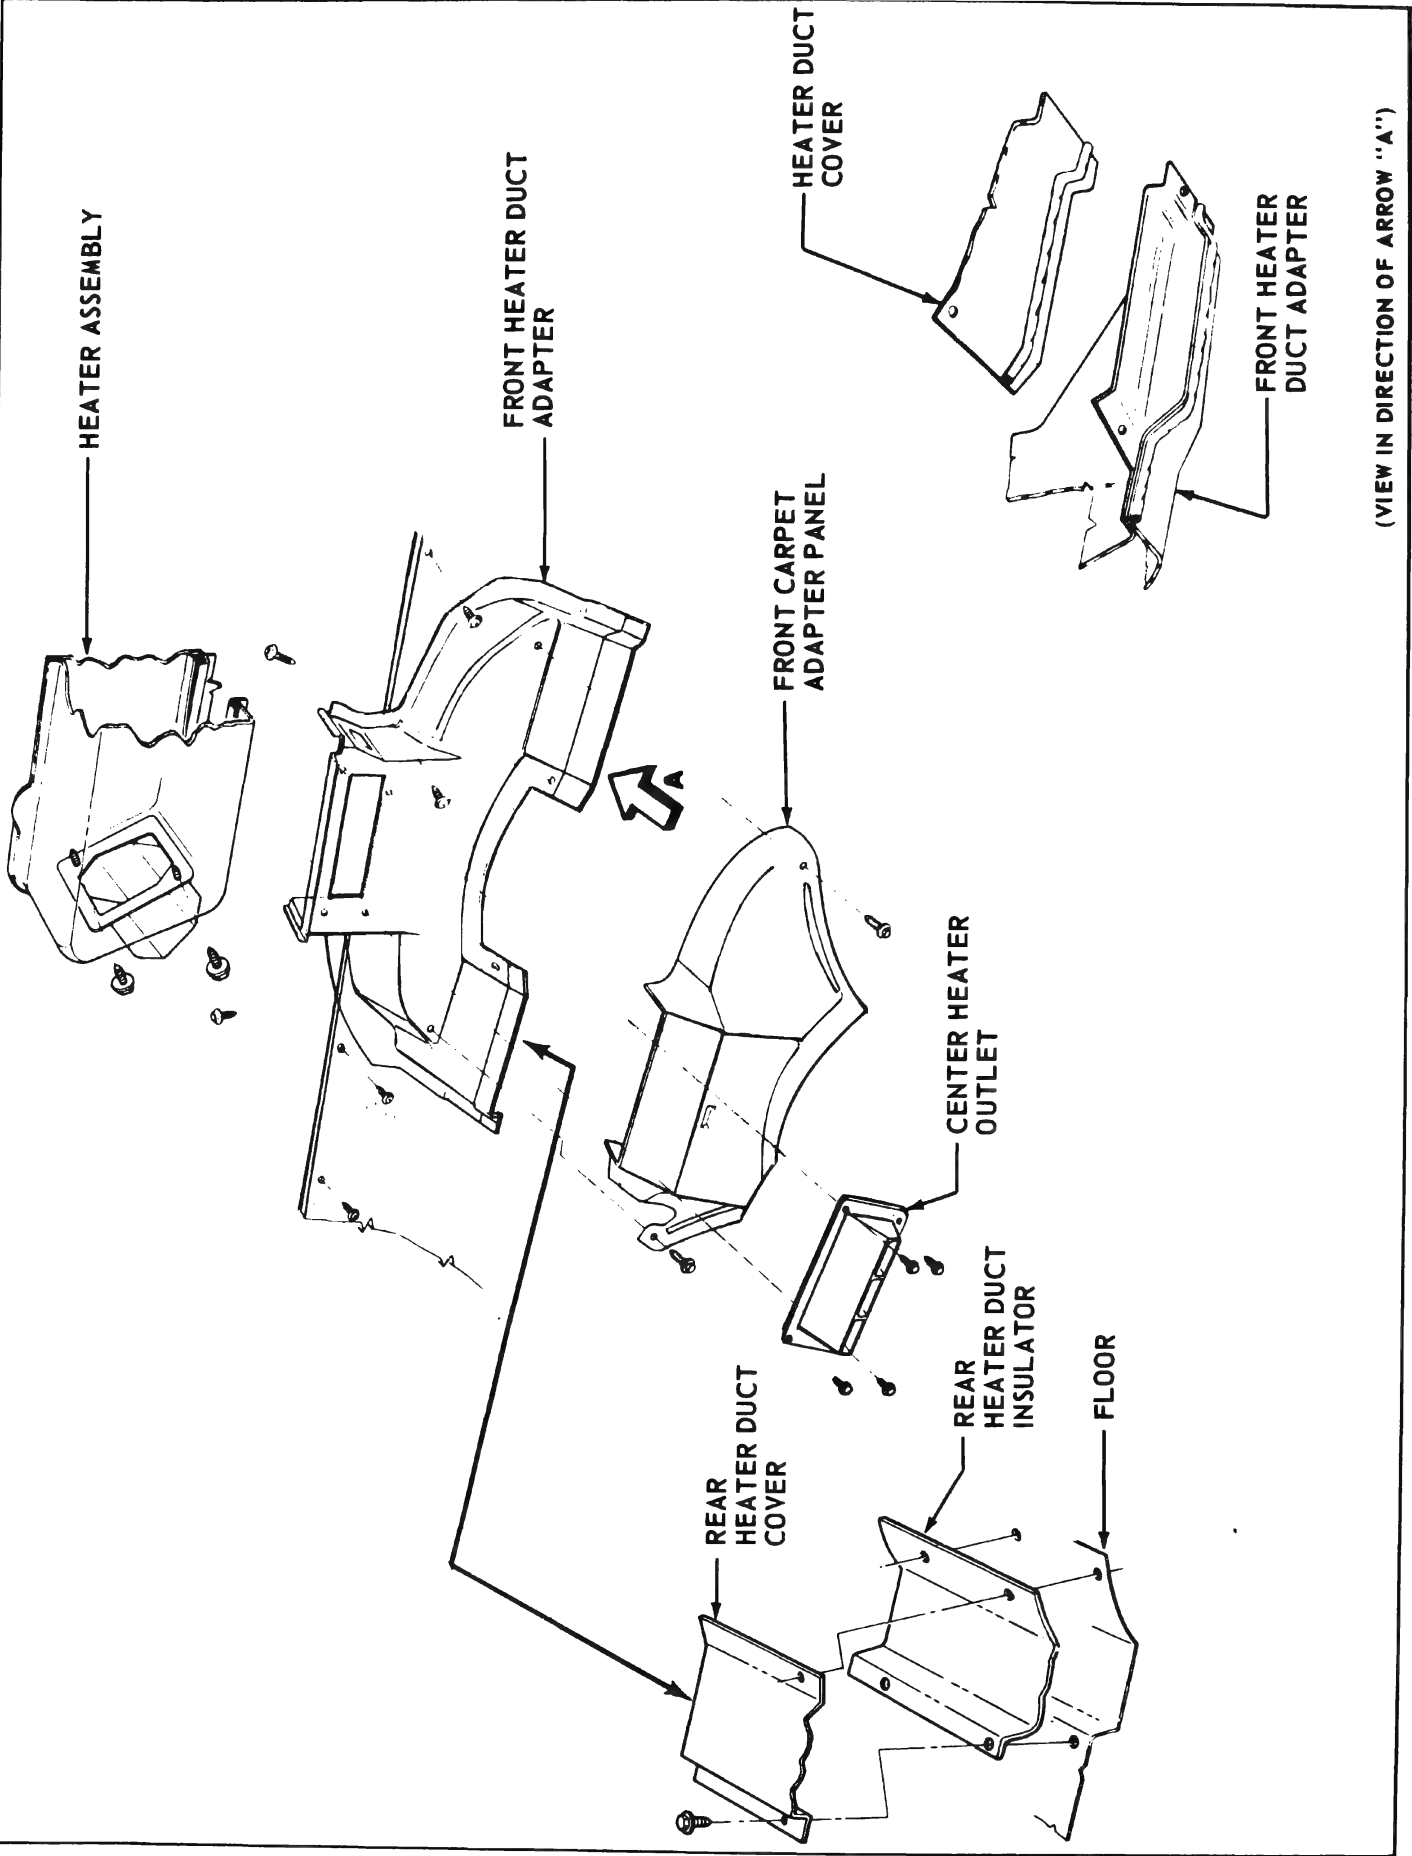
Heater System Installation - 4400, 4600 and 4800 Series
